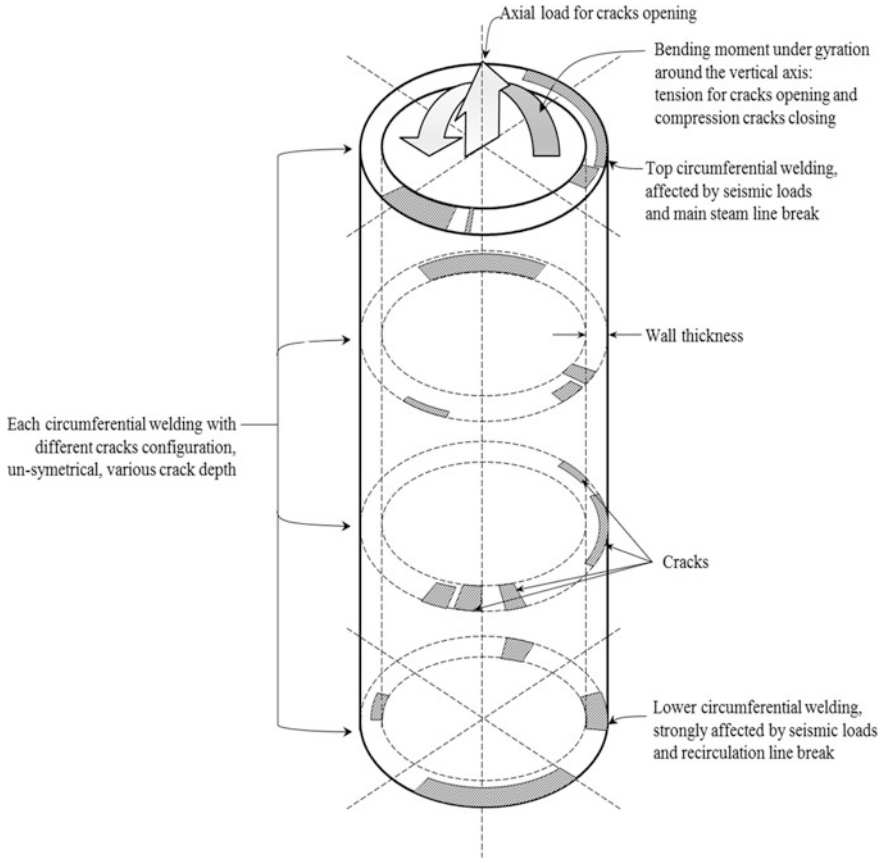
Designation of a core shroud welds of a generic BWR
